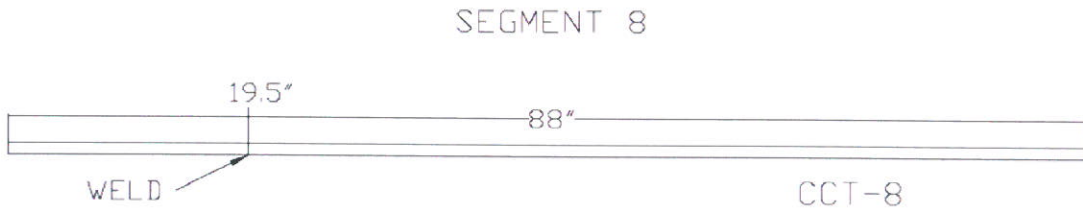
CAD schematic of Segment 8 showing location of weld after removal of coating.
